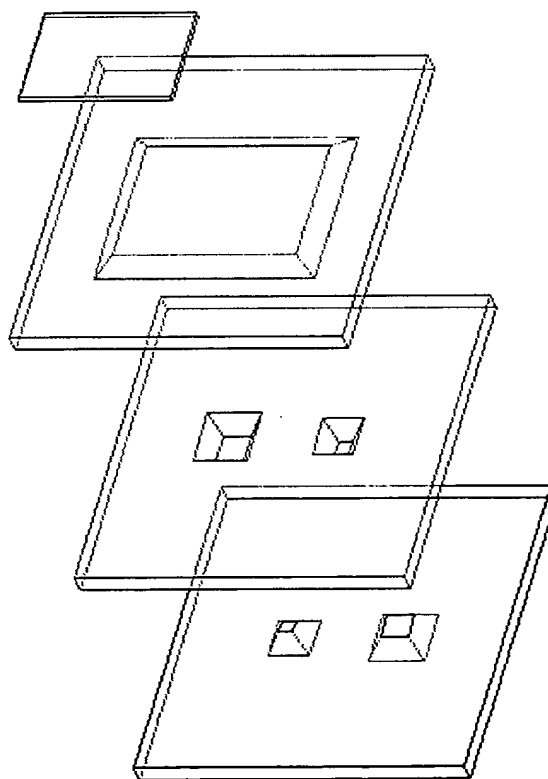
Exploded view of Pro/ENGINEER CAD model used to generate the micropump geometry. Note that the CAD model does not include the flaps associated with the inlet and outlet valves.
